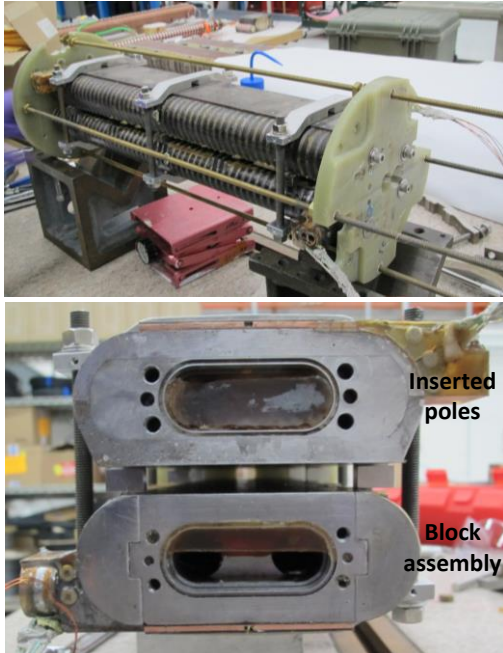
Photographs of the fabricated undulator magnets and assembly in the undulator configuration. Side view is shown at the bottom.
